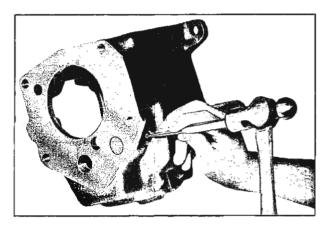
Driving Reverse Idler Shaft Lock Pin into Shaft
